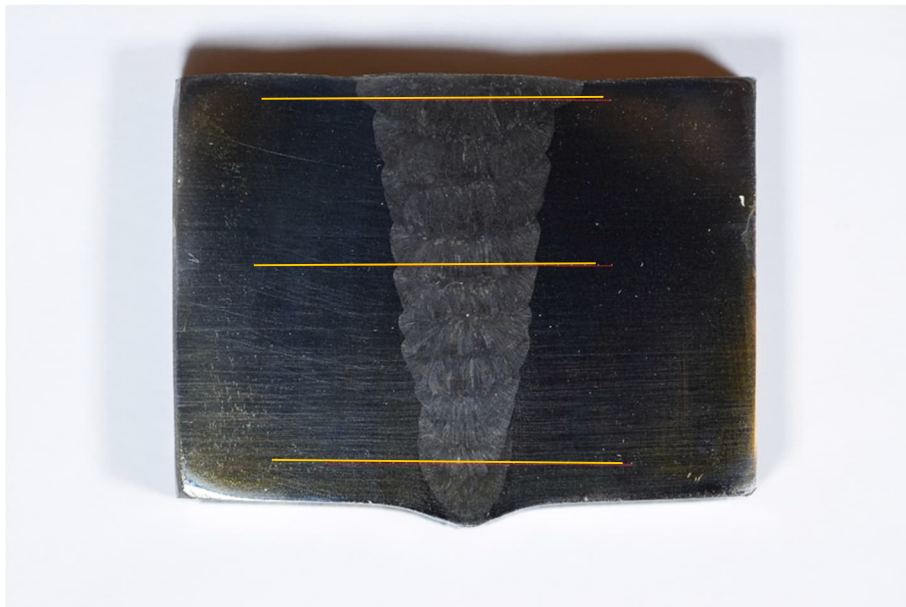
Location of hardness measurement lines in the pipe weld cross-section.
